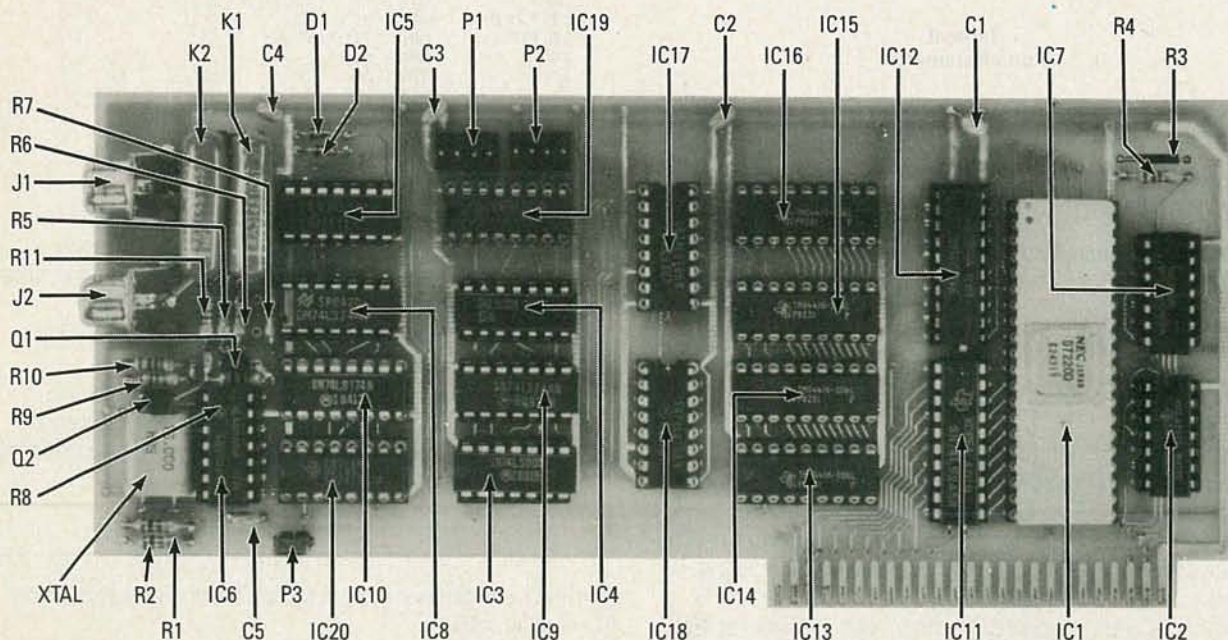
PARTS PLACEMENT is shown above. No components are mounted on reverse side of board.
